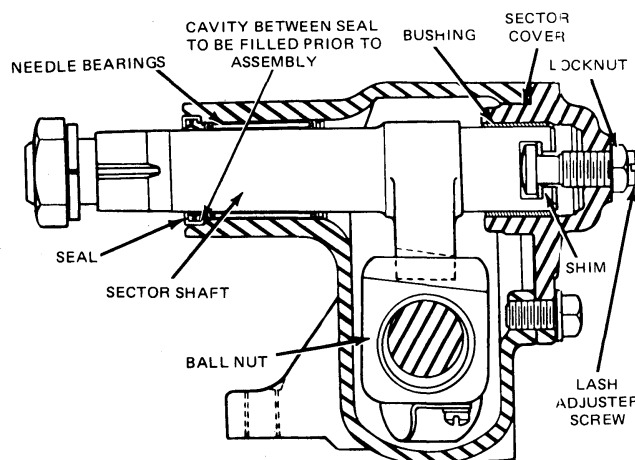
Manual Steering Gear—Recirculating Ball—E-100—E-350, F-100—F-350
